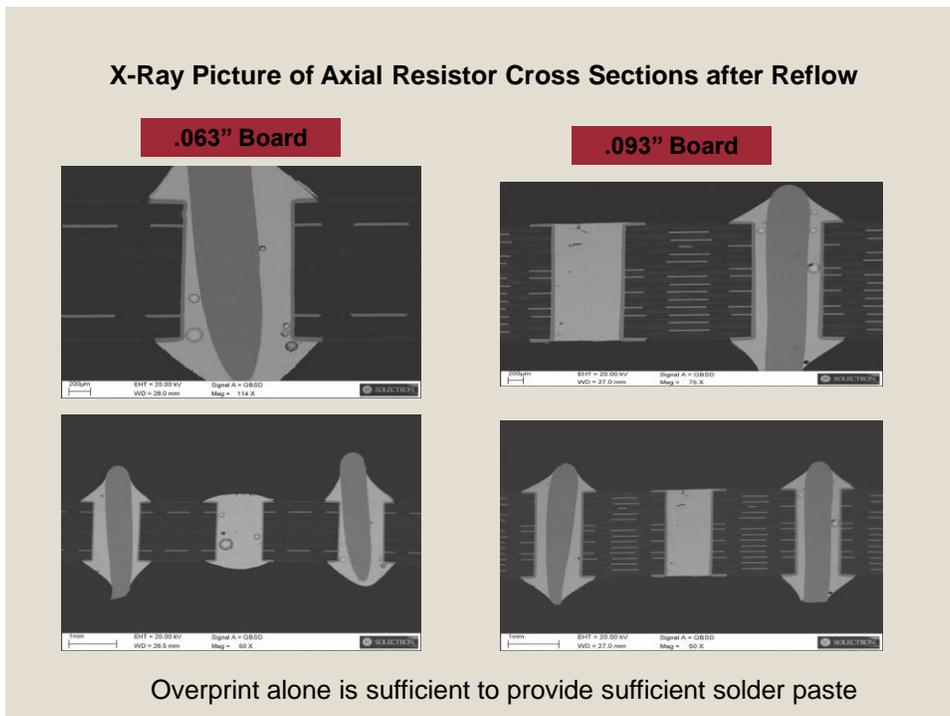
X-Ray of Pin-In-Hole showing sufficient solder fill
